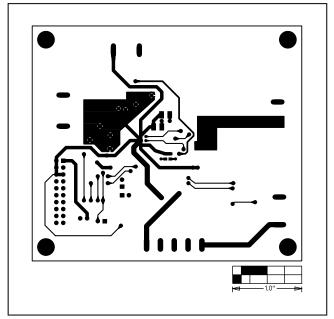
MAX1645B EV Kit PC Board Layout—Solder Side
